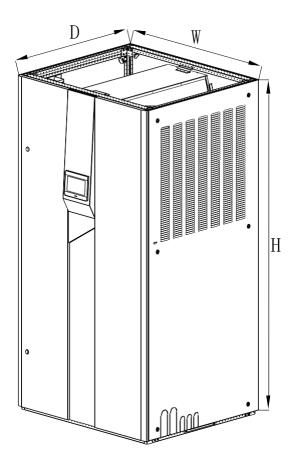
Dimensions of EACCR025 / 030 / 035 / 040 / 045 / 050 Lower Air Supply Models
